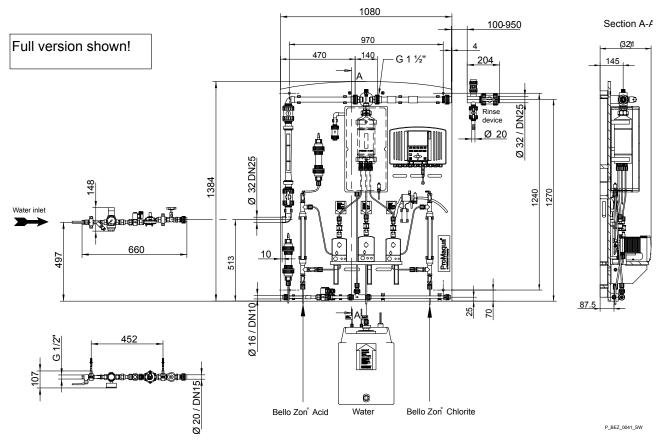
Dimension sheet CDKc 170 ... 900, fully equipped version - dimensions in mm
